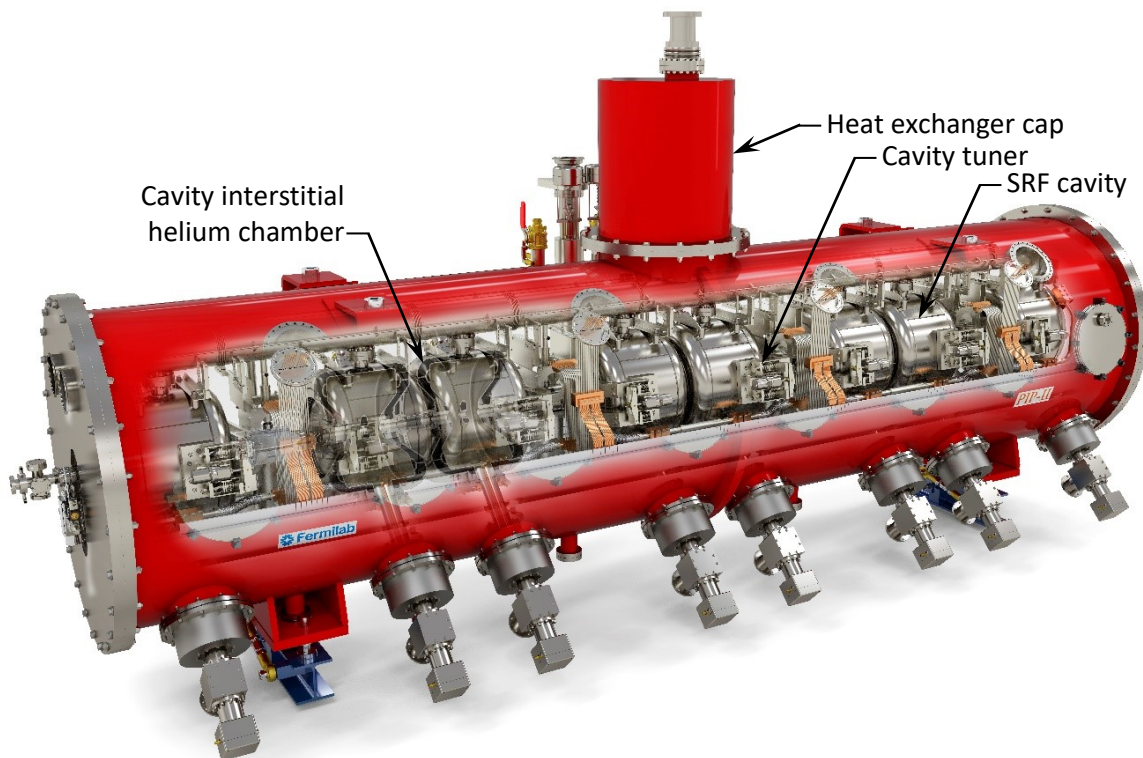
SSR1 Prototype cryomodule with cut-away view. [25]
